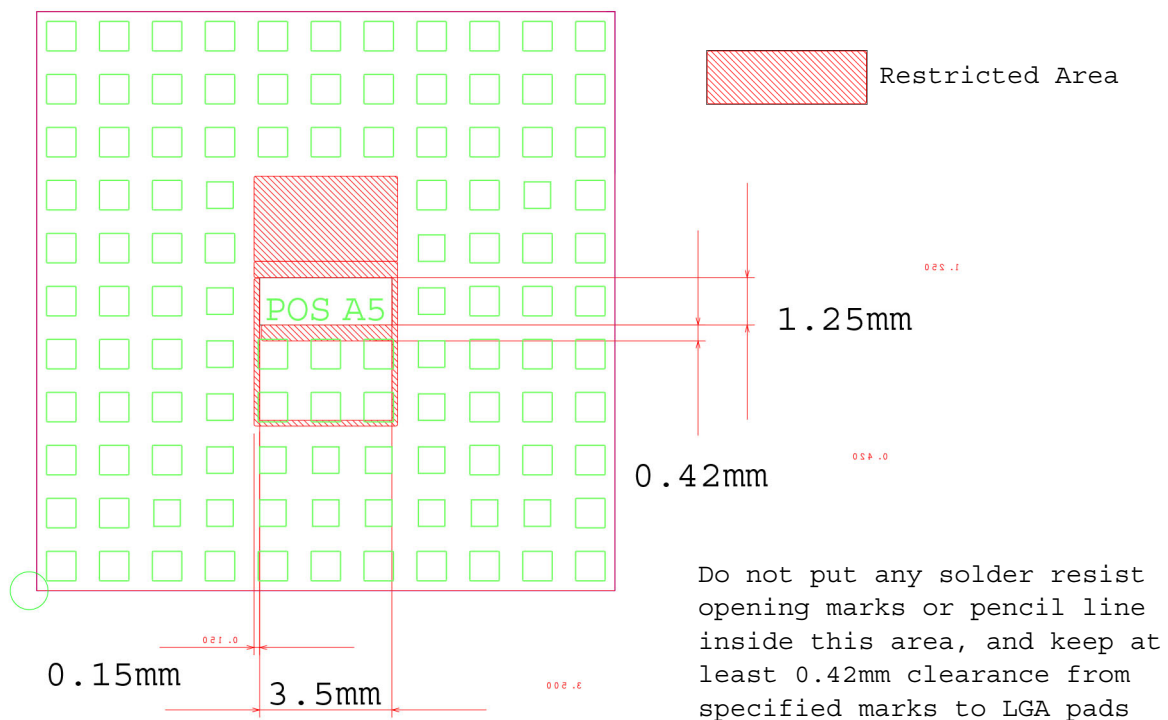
Dimensions of area for possible markings TN23-W (bottom view)
